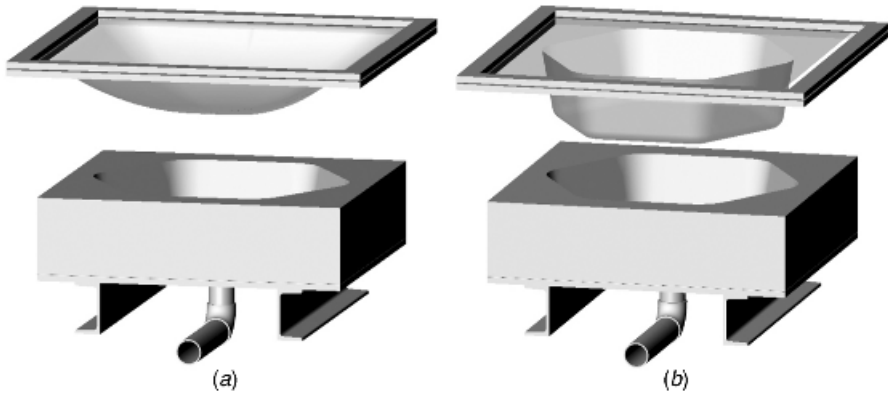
Female mold: (a) drape; (b) drape formed.
